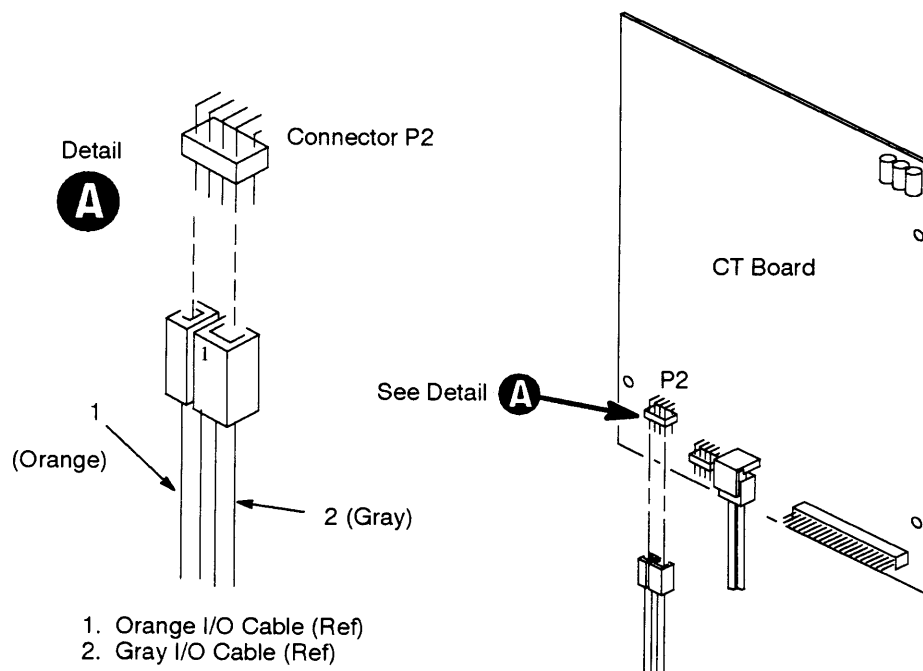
Cable Assy, Coaxial/Twinaxial I/O, Removal
